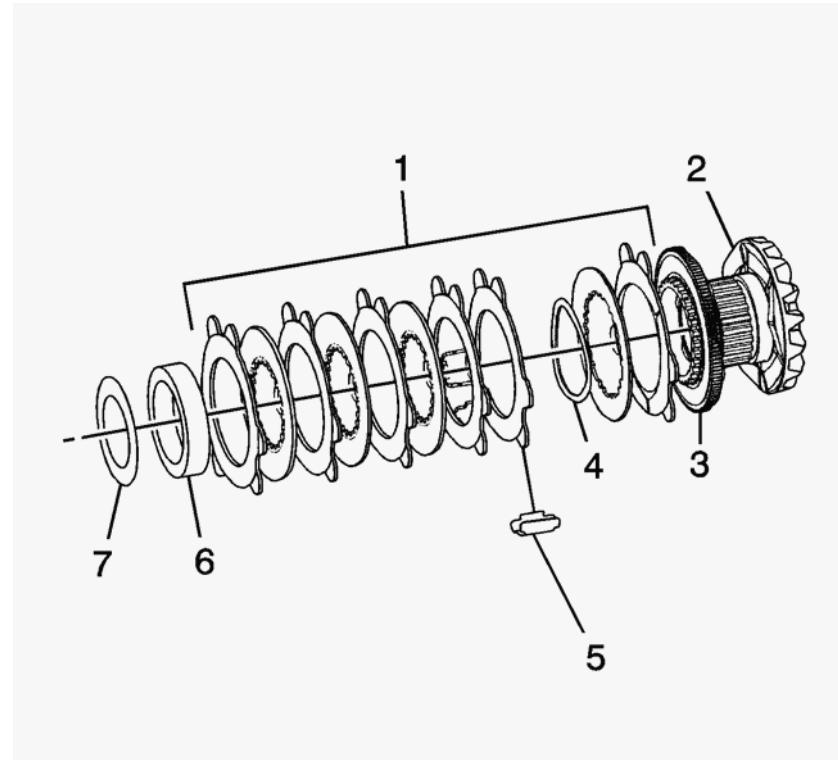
Disassembled View Of Locking Differential Clutch Disc Set
